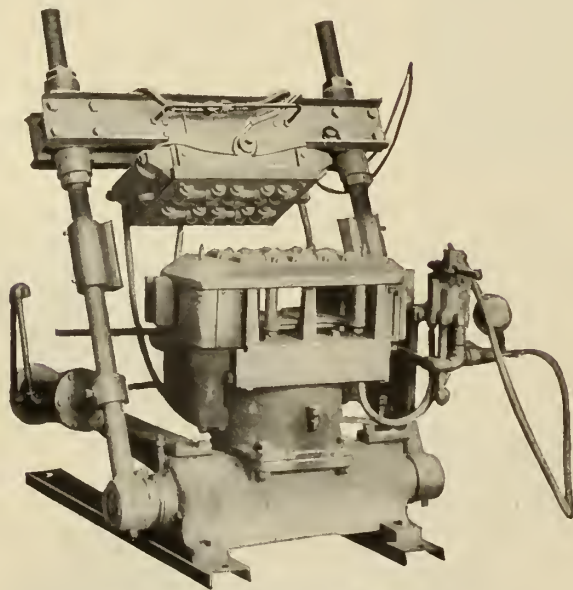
Multiple Molding Machine: Upper Head Swung Back to Receive Flask.
